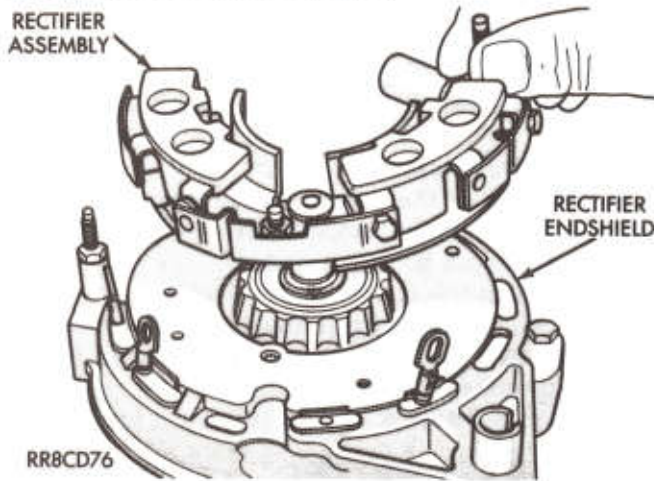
Remove or Install Rectifiers 120HS Alternator
